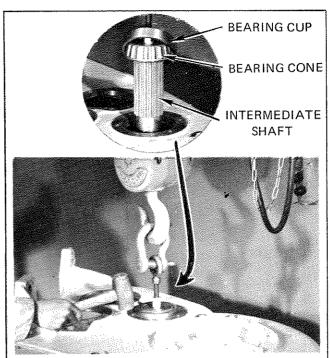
REMOVAL OF BRAKE SHAFT ASSEMBLY
